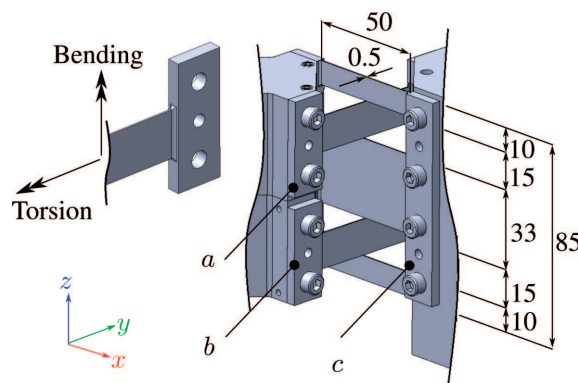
Cross flexure dimensions in millimetres, bending and torsion visualized
